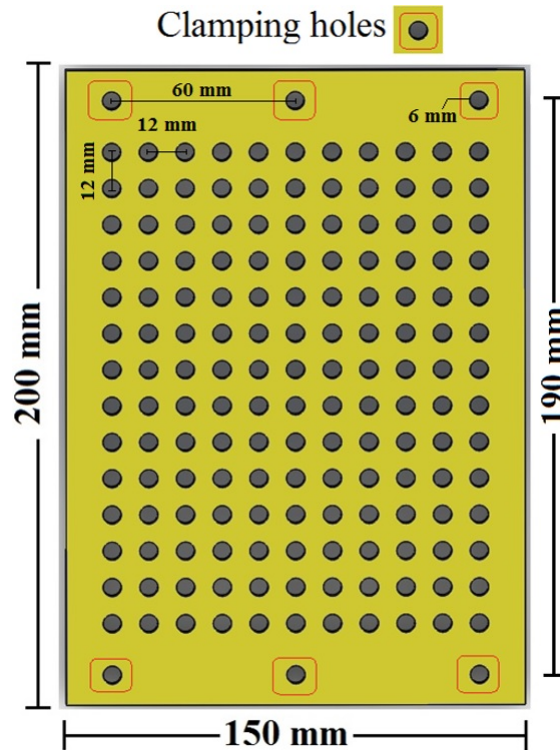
Panel details and dimensions used in the drilling tests [303, 304]
